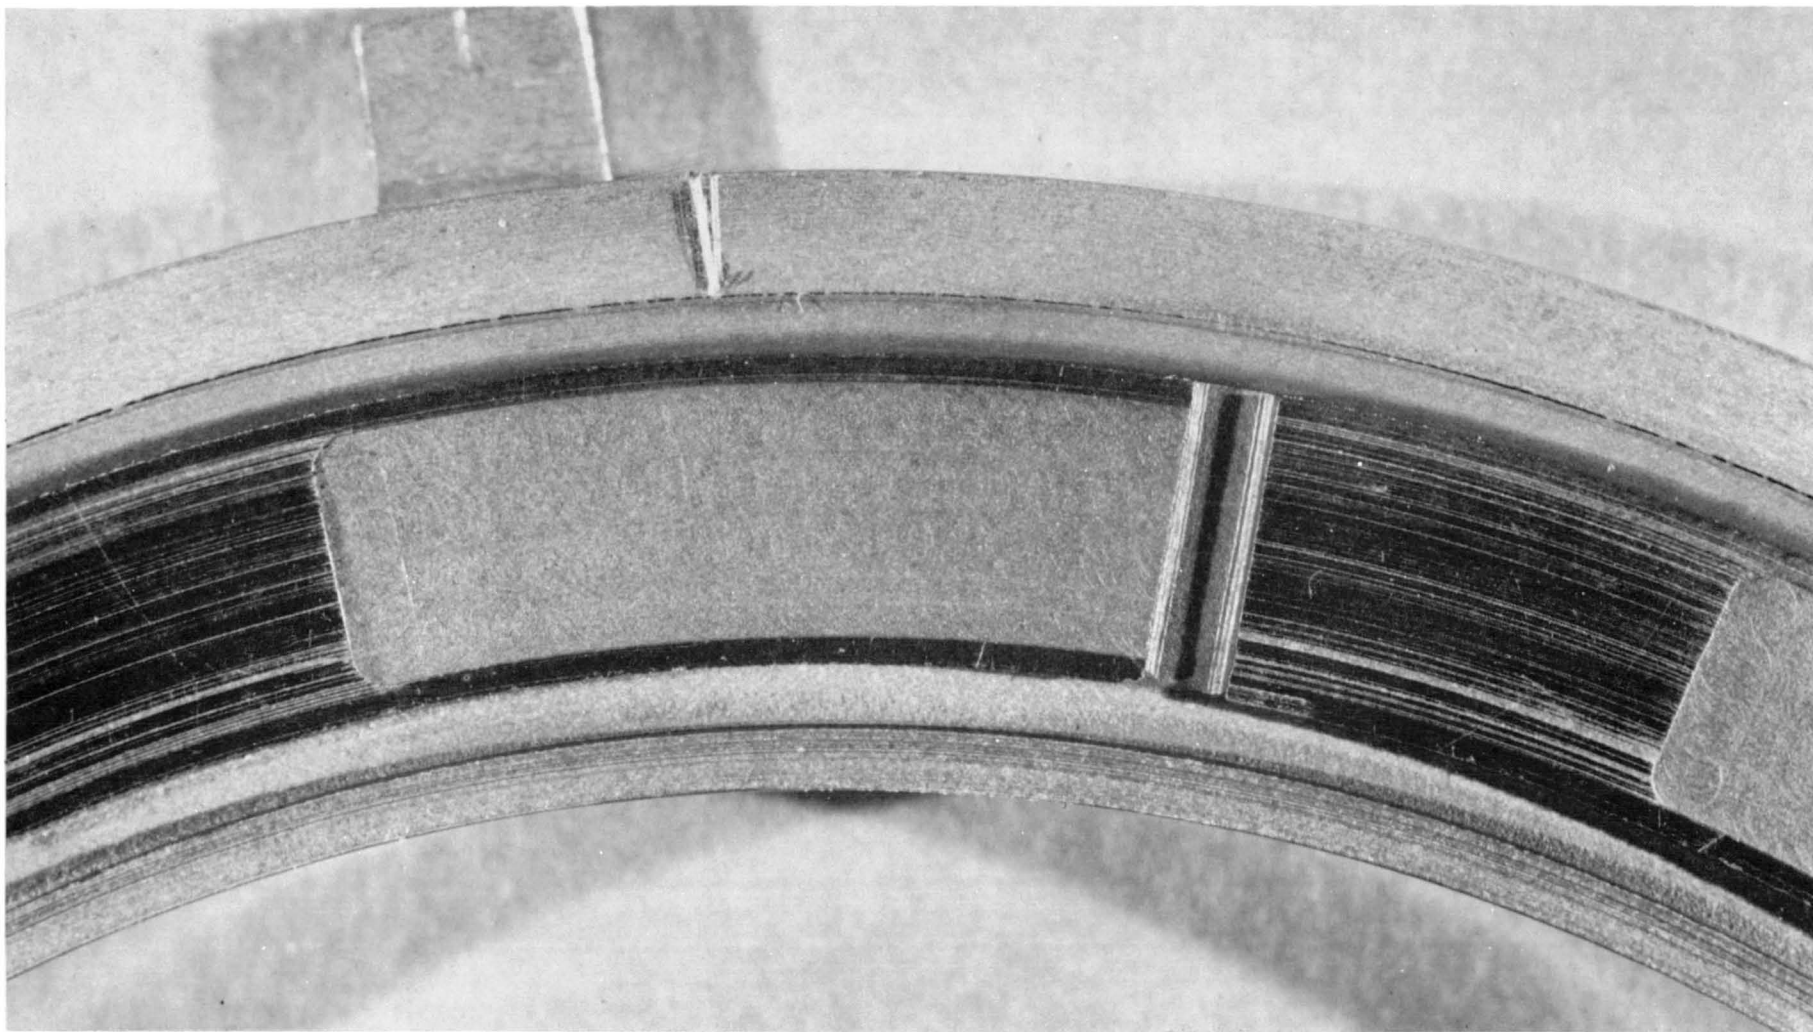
Typical Seal Carbon Recess Pad CF851218,
